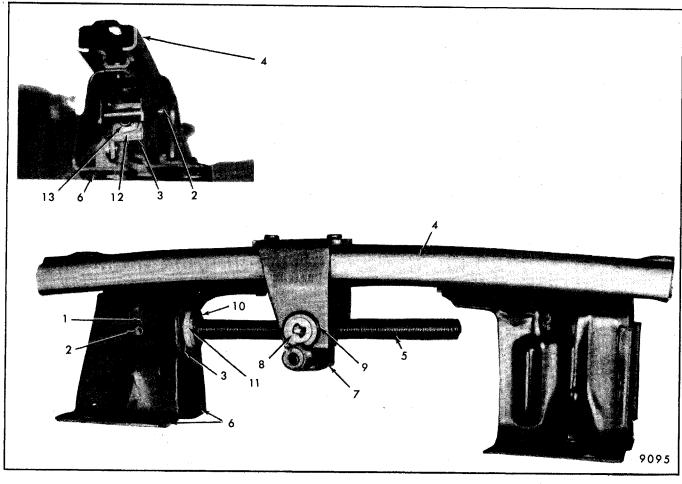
Power Operated Horizontal (Two-Way) Seat Adjuster Components
